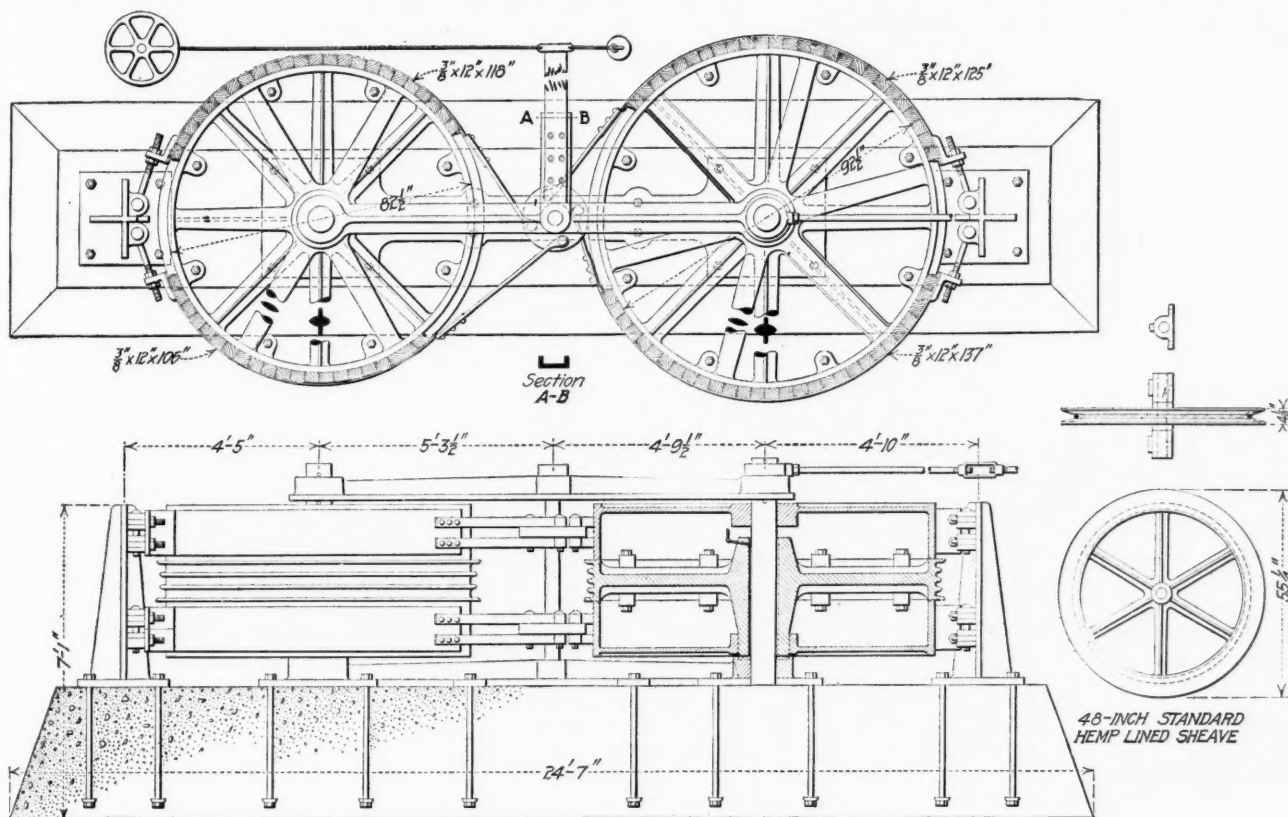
A No. 16 SPECIAL INCLINED-PLANE MACHINE
